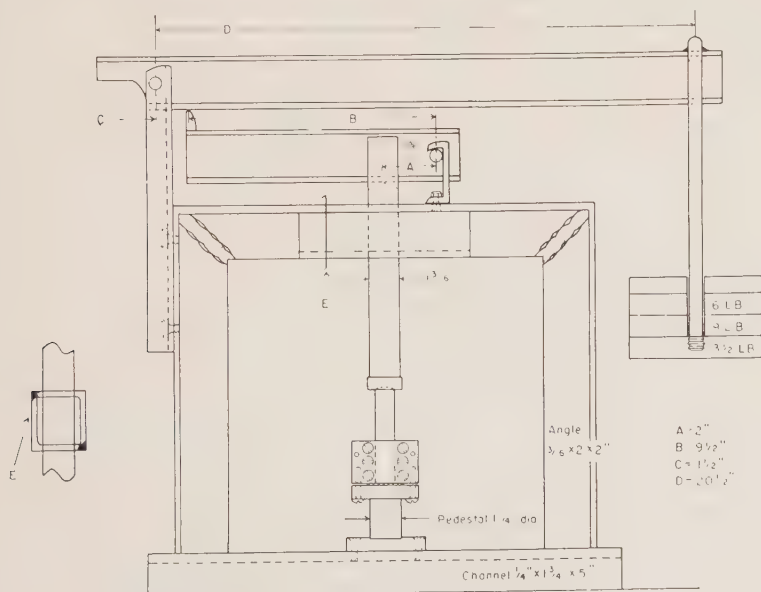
Diagram showing in elevation the assembly of press and mold.
